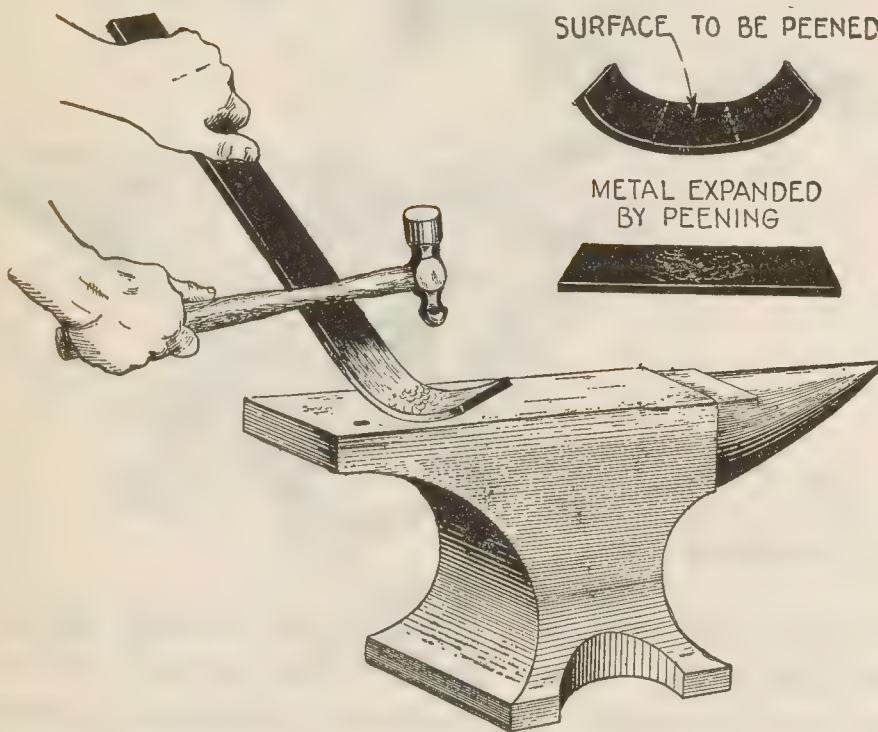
,968 to 9,970.—*Straightening 2. By Peening.* This method is used in straightening thin flat pieces such as saws, knives, etc. The metal is struck with the peen of the hammer of blows distributed along the inner surface of the bend. The action is shown in figs. 9,969 and 9,970; it stretches the metal along the inside of the curve and consequently causes it to expand thus straightening the bar. To peen out a bad dent in an automobile body or fender. hold a hand anvil behind the dent, beginning at the outside edge of the dent and carefully work around the dent and in toward the center, thus gradually returning the metal to its original position.
